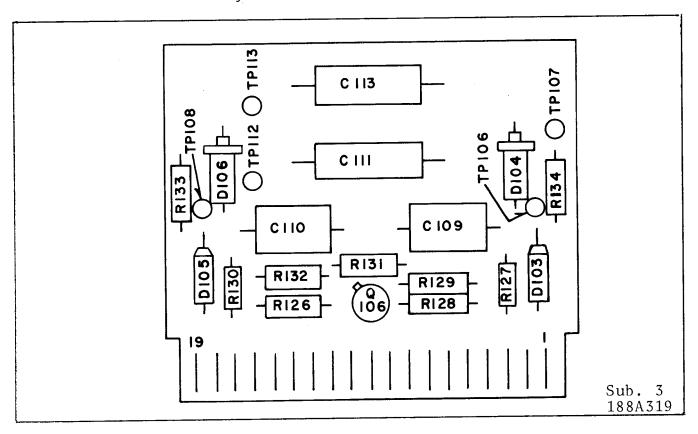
Power Amplifier Printed Circuit - Parts Location
